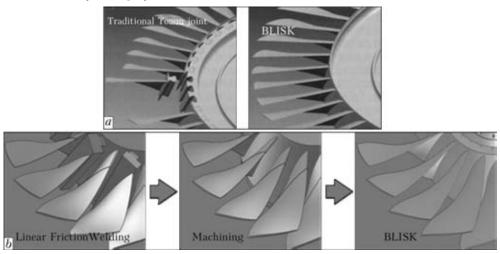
For aero-engine weight reduction (a) tenon joining replaced by (b) welded integrated blisk using linear friction welding as solid state additive manufacturing
